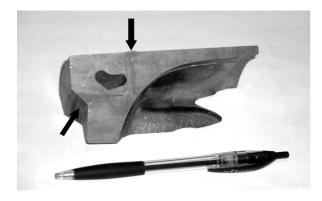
Templet of the compound welded piston with the cavity of cooling (arrows indicate welds)
